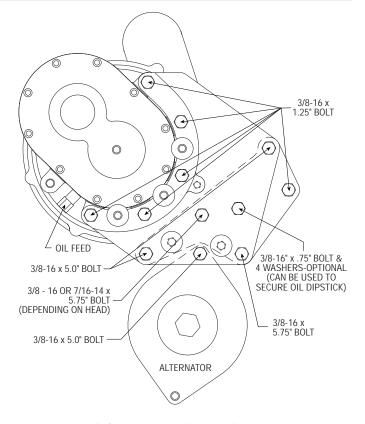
b / Passenger side supercharger mount ('69 Mustang)
